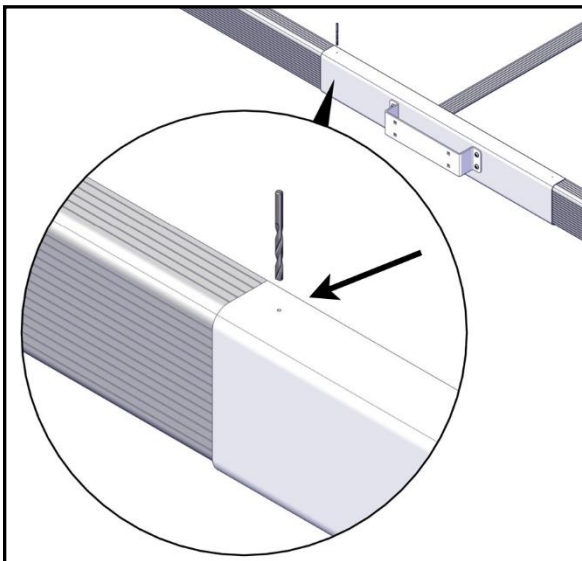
HOLE DRILLING THROUGH THE C-CHANNEL
